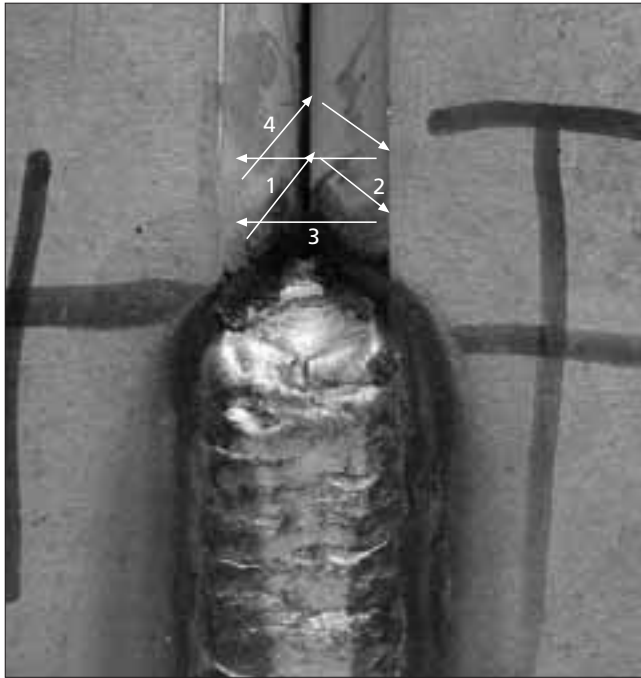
Vertical-up welding using the “in and out” technique
